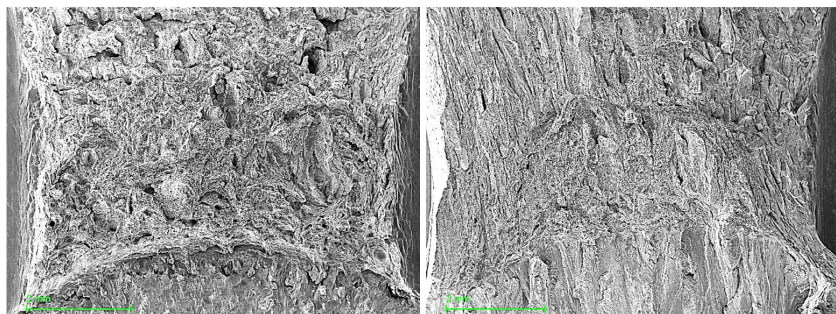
SEM images showing the fracture surfaces of as-welded (left) and PWHT (right) state Alloy 52 weld metal specimens.
